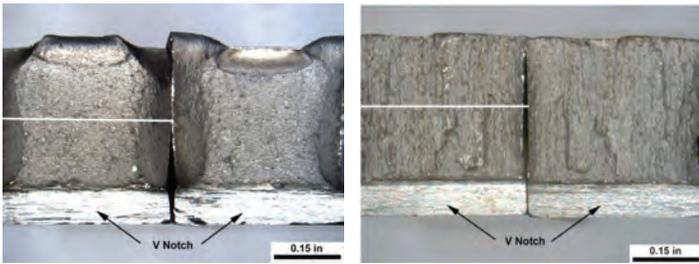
Impact specimens post-fracture from Forging A (left) and Forging B (right)
